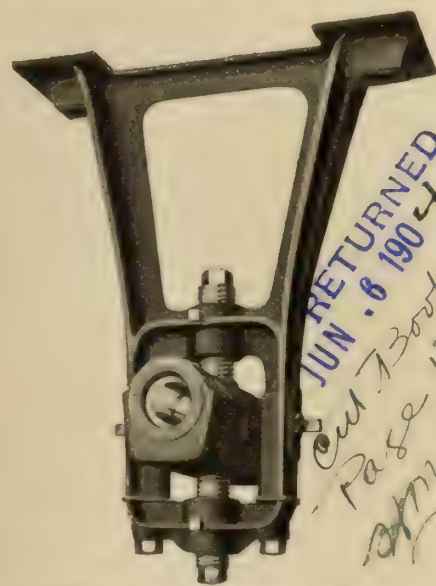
Illustration No. 2 shows Universal Giant, ring oiling, B. & S. post hanger. The length of bearing is equal to four diameters of shaft.
